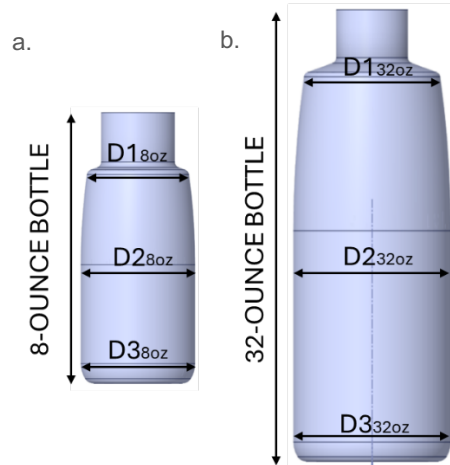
a. 8-ounce bottle dimensions design, b. 32-ounce bottle dimensions.
